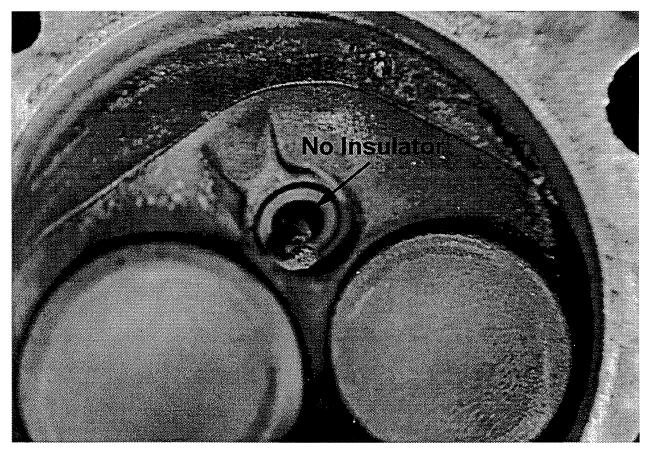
Cylinder head showing Cylinder 4 combustion chamber
